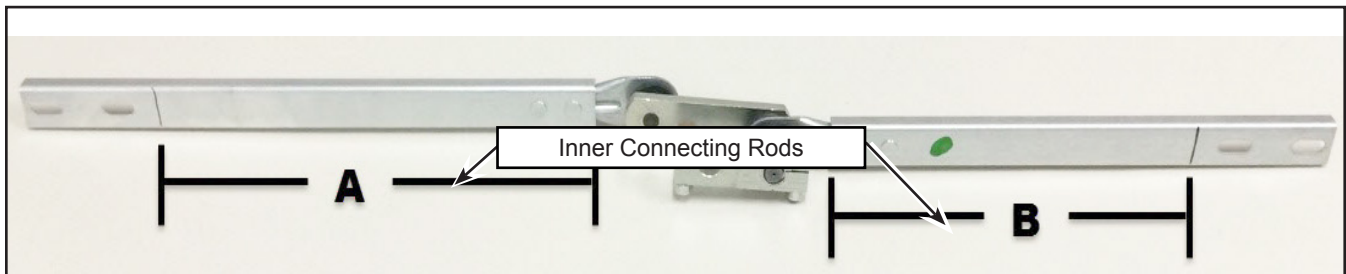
Transfer Dimensions A and B to the New Linkage Assembly
